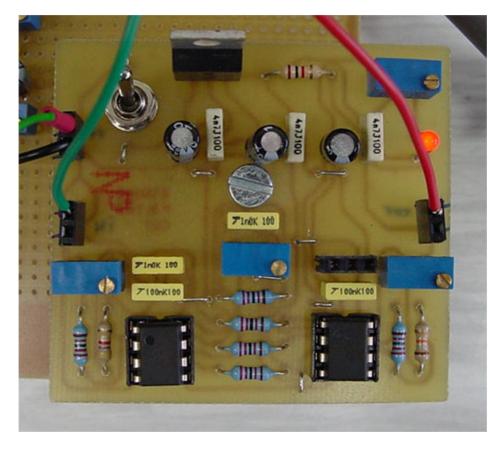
Photograph of the fabricated PCB for the circuit under test. It is a tunable low-pass Biquad filter. Input and output signal wires can be checked at the picture.
